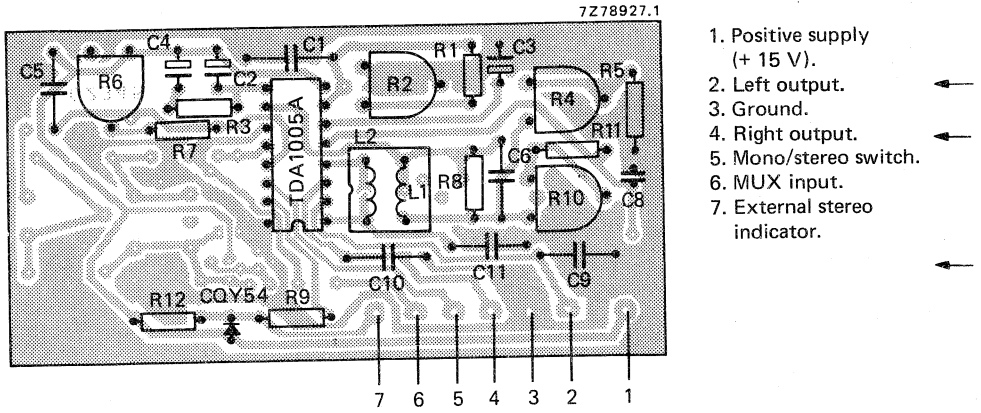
Printed-circuit board component side of an f.d.m. decoder, showing component layout. For circuit diagram see Fig. 7.
